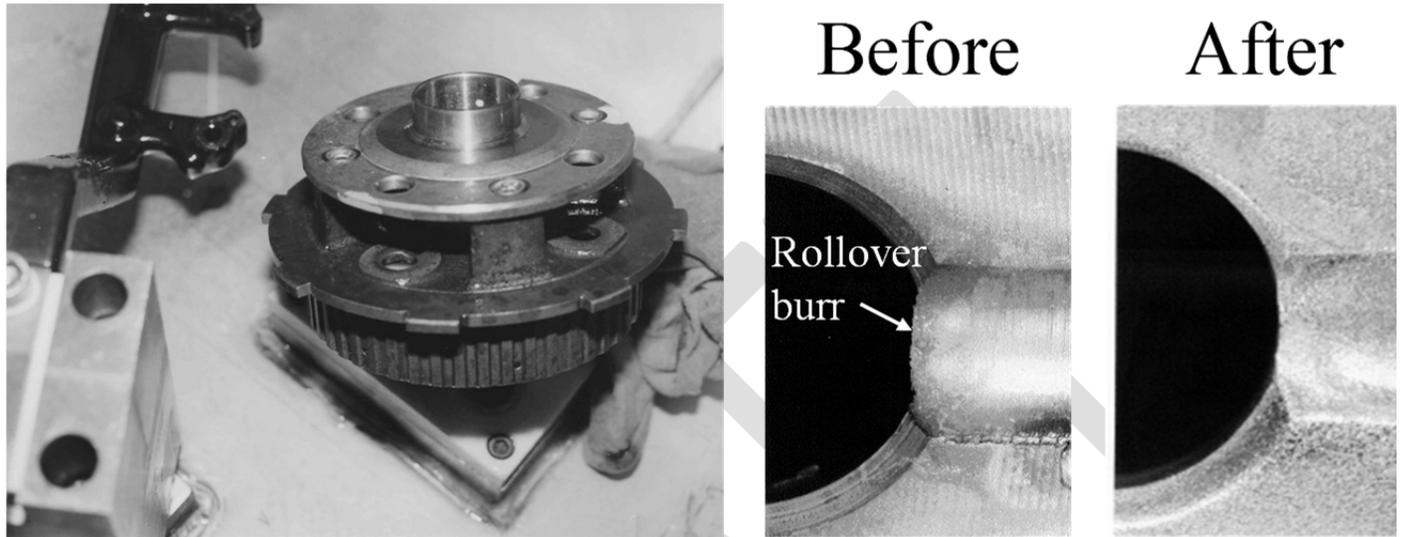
Picture of (a) planetary gear and cathode tool and (b) oil-groove before and after deburring.
